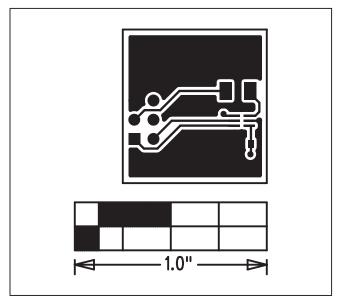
MAX44005 Daughter Board PCB Layout—Top
